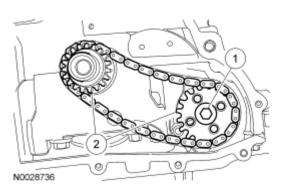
Identifying Chain & Sprockets Courtesy of FORD MOTOR CO.
